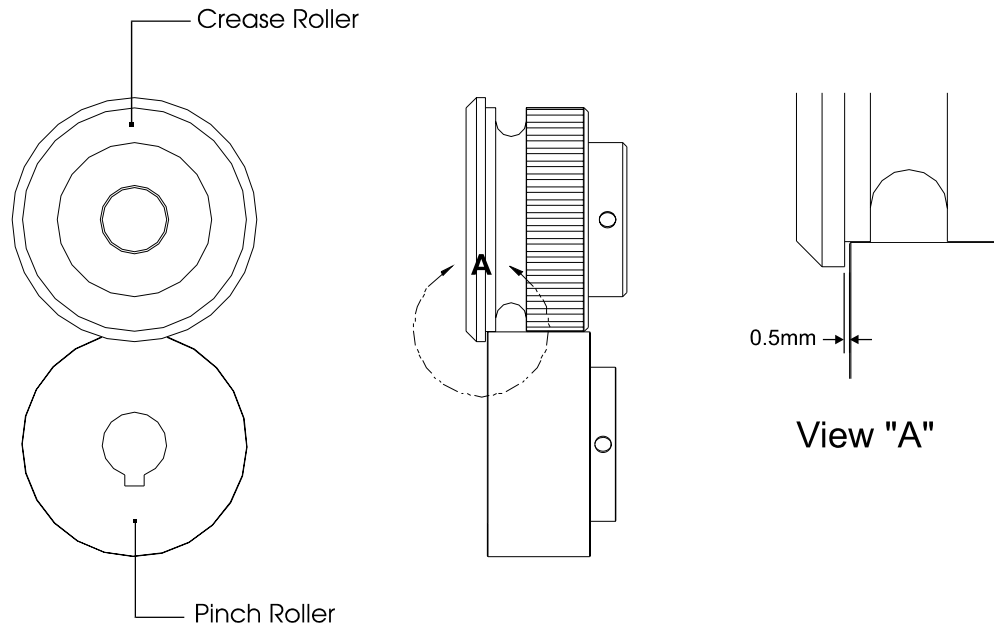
Illustration of the crease/pinch roller combination showing the roller gap setting of 0.5mm.
